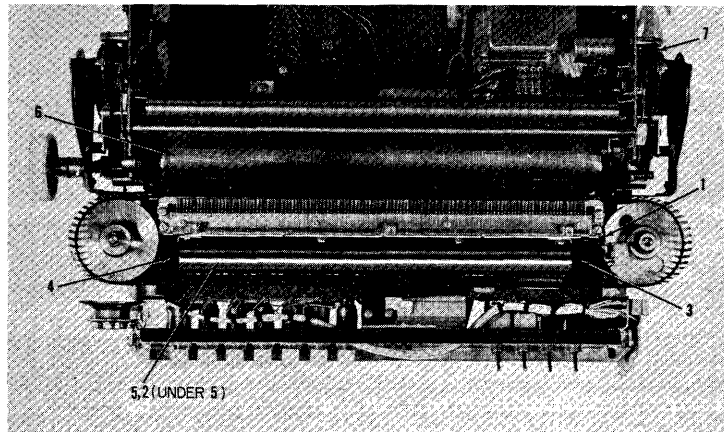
Hammer and Print Belt Assembly (Top View)—TermiNet 300 Printer
